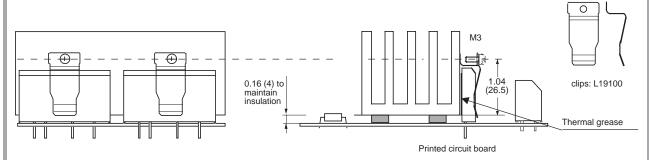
Clips with screws on standard heat sinks; dimensions in inches (mm)
